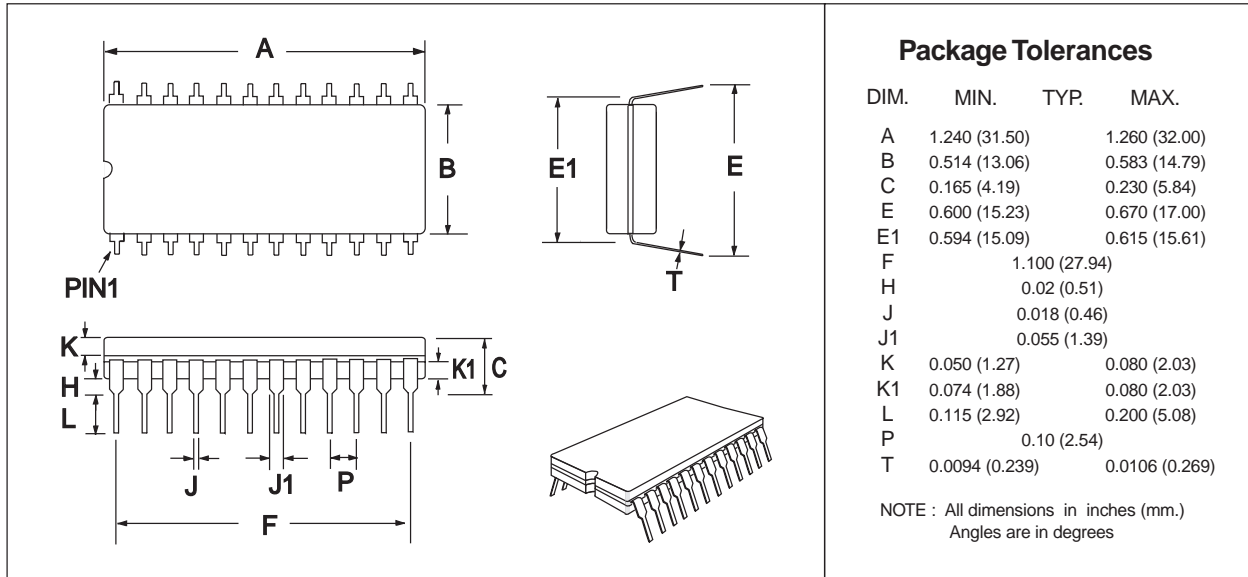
24-pin CDIP Mechanical Outline: Order as part no. MX465J
